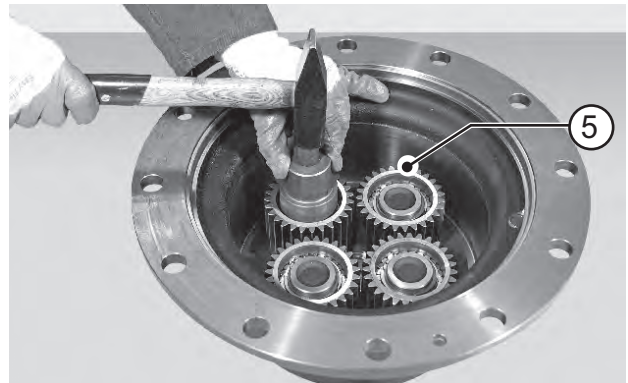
Insert the planetary gears (5) into the cover (3). Lock gears (5) into position by installing the snap rings.
